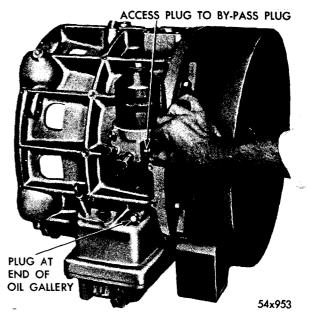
Removing or Installing Access Plug to Oil Cooler By-Pass Plug
